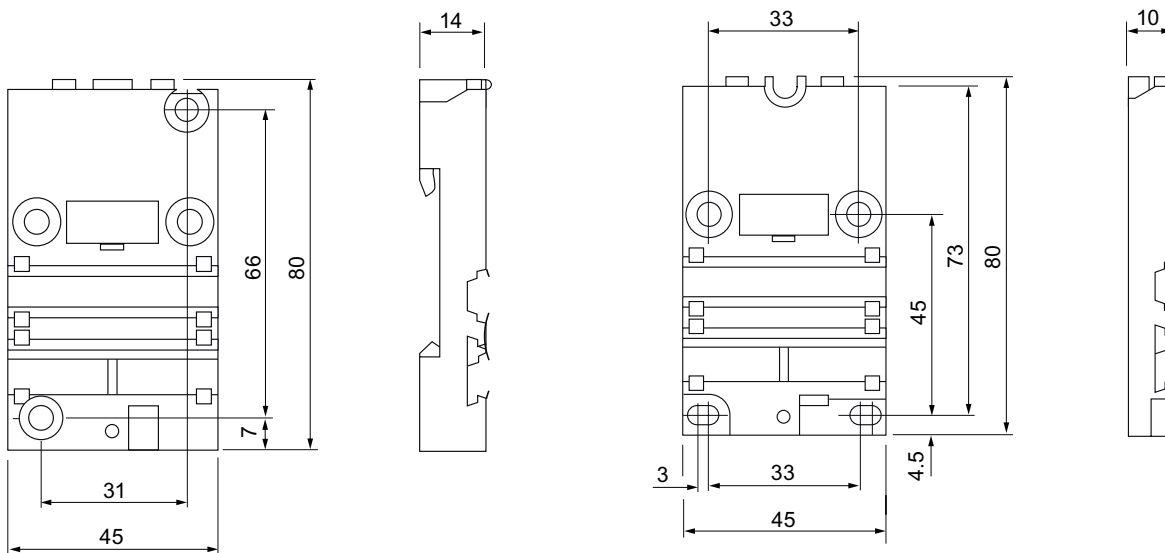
K45 mounting plates (DIN rail mounting on left, wall mounting on right)
